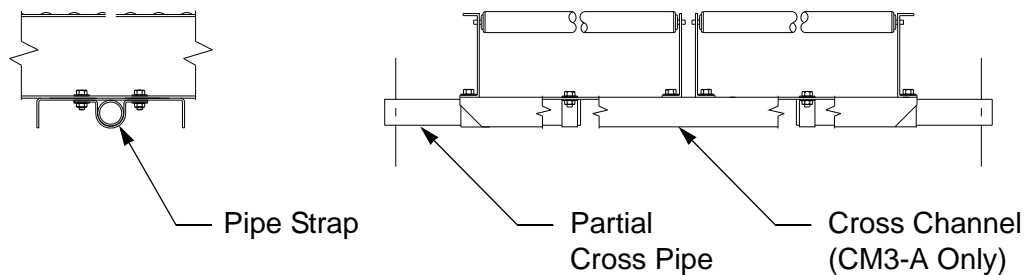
CM3-A & CM3-B Ceiling Hangers
